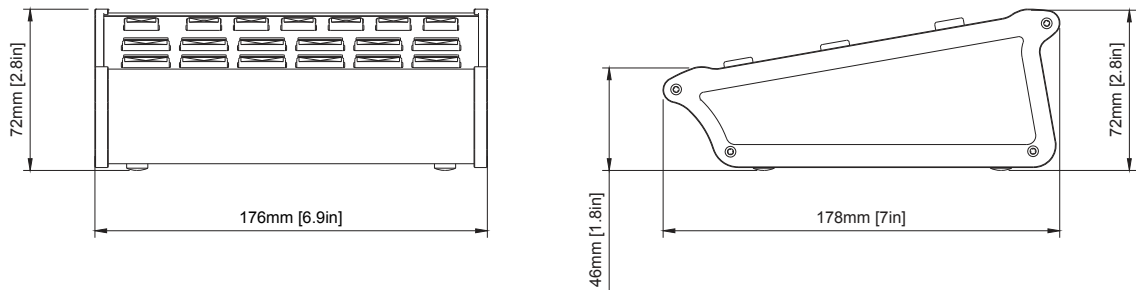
Technical drawing of Frame Shot Pro with key dimensions and layout details.
